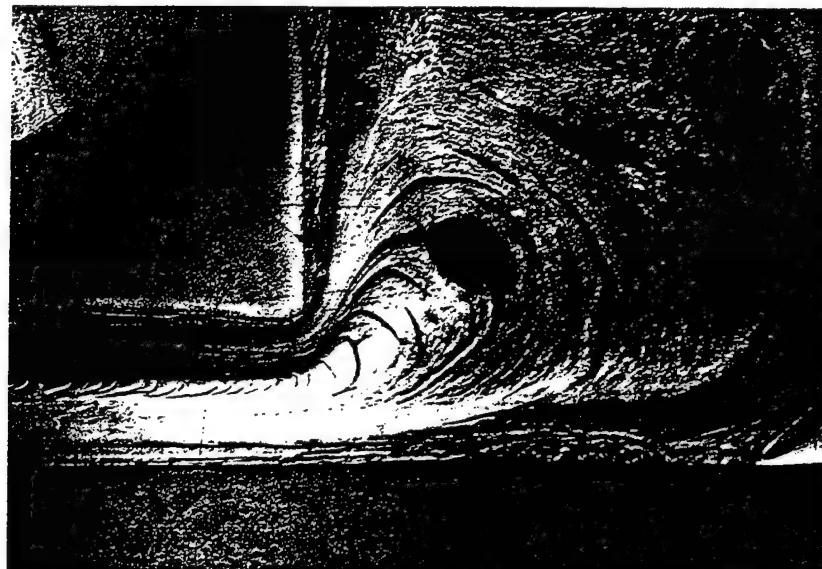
Longitudinal section of injection corner of unburned tube showing many smaller cracks. Magnification: 9.6X.
